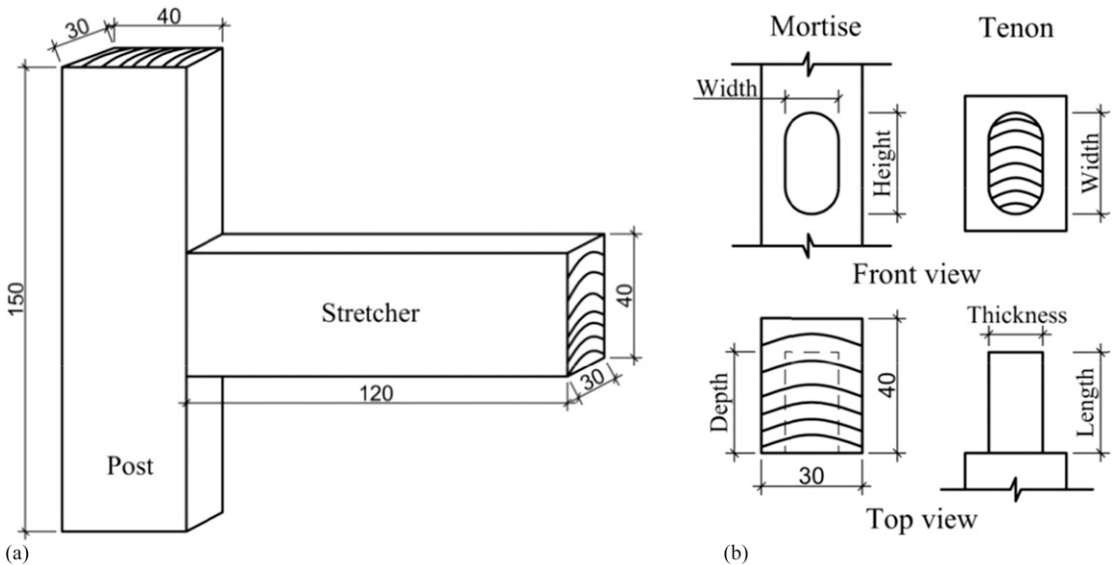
The configuration of a typical specimen (a) used in this study for evaluating tensile loads of T-shaped mortise-and-tenon joints, and detailed shapes and dimensions (unit: mm) of mortise-and-tenon (b).
